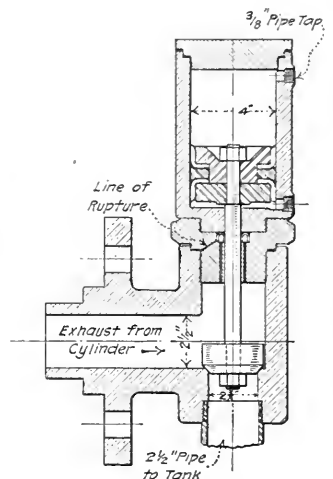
EXHAUST VALVE FOR 5000 LB. PER SQ. IN.
